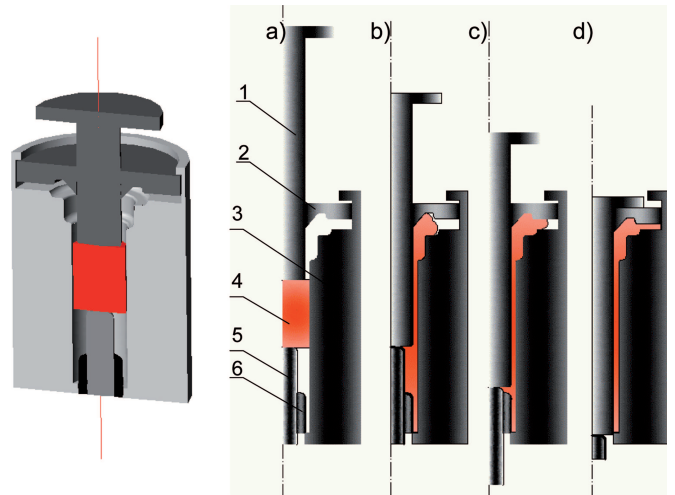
The tool model and the method for double-sided extrusion a) stage I, b) stage II, c) stage III, d) finished product [8] 1.upper punch with pressure plate, 2. die forging, 3. container, 4. perform, 5. bottom punch, 6. ring
